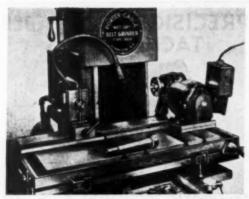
Cylindrical sections of parts can be ground on an abrasive-belt machine by means of a motor-driven fature equipped with centres for mounting the work.
